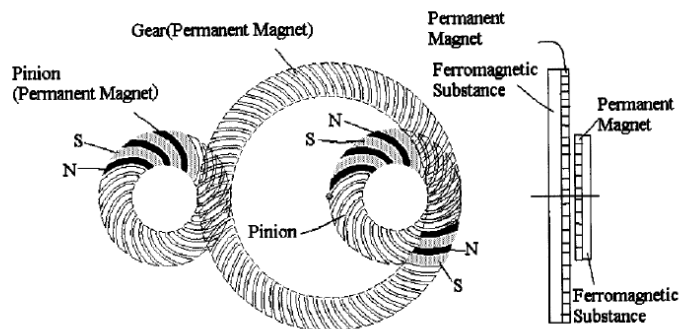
Axial-flux disk-type spur magnetic gear [6].
